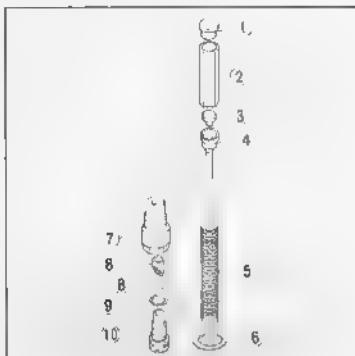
① Rubber tensioner ④ Sealing washer 14 mm
